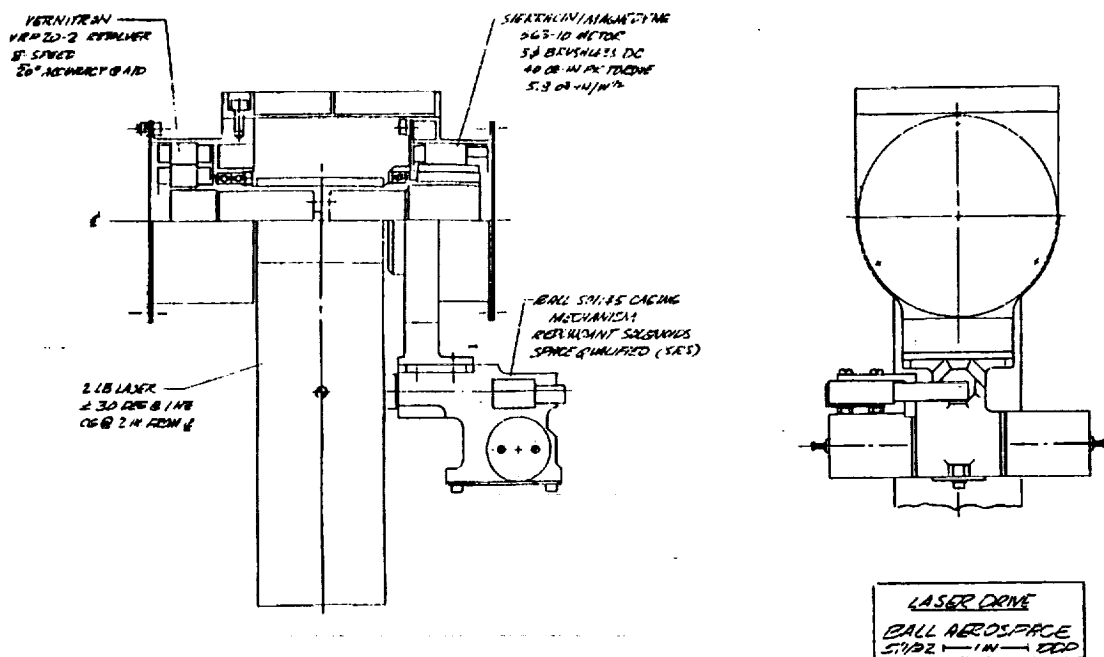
Ball Gimbal Design Drawing for CSI-Star Laser/Sun Sensor Payload.
